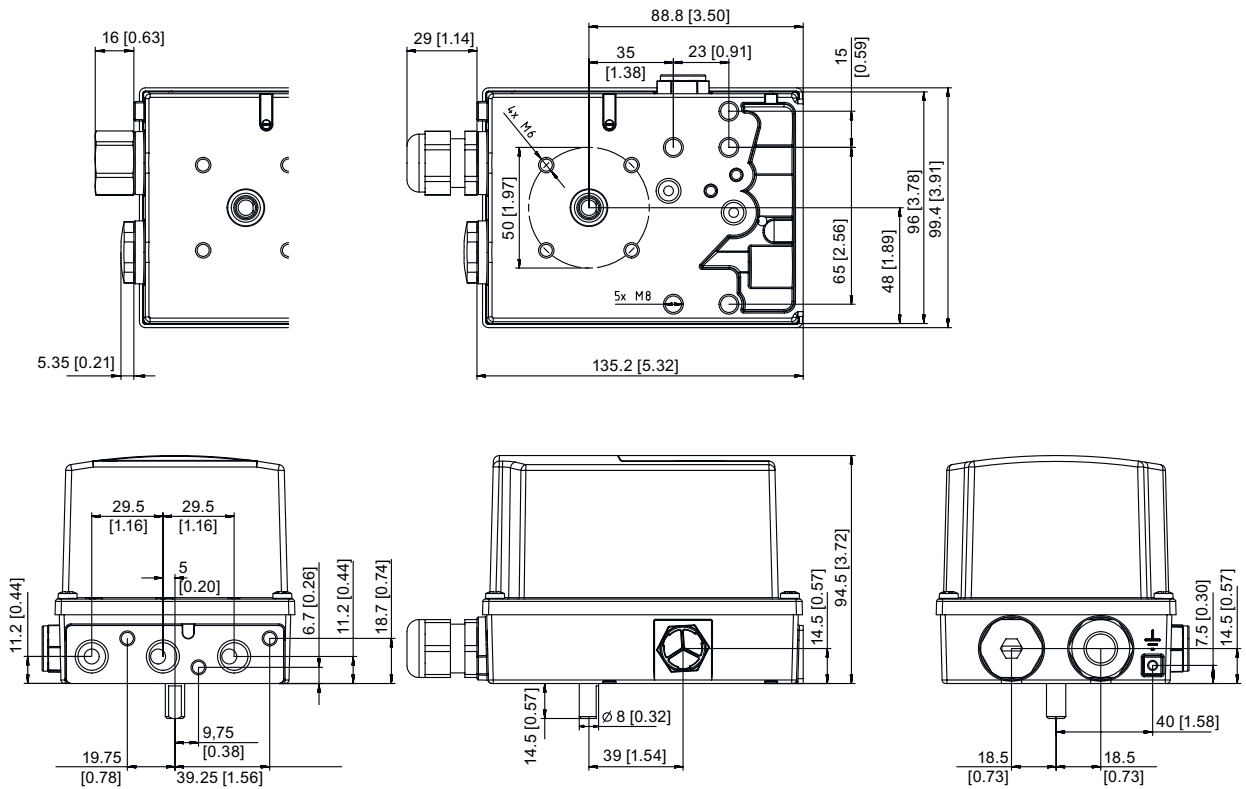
Dimension drawing, dimensions in mm (inch)
